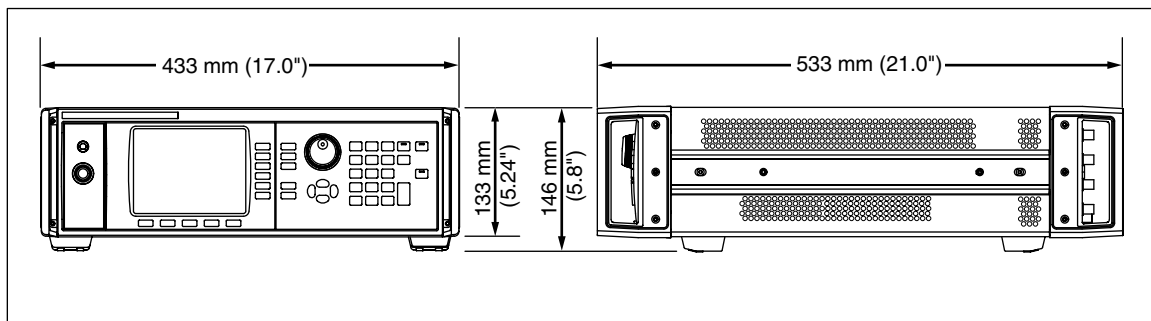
9640A RF Reference Source – Dimensional Outline Drawing
